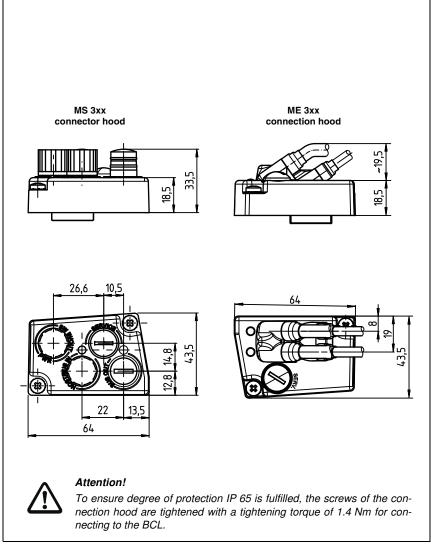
Dimensioned drawing of MS 3xx connector hood / ME 3xx connection hood
